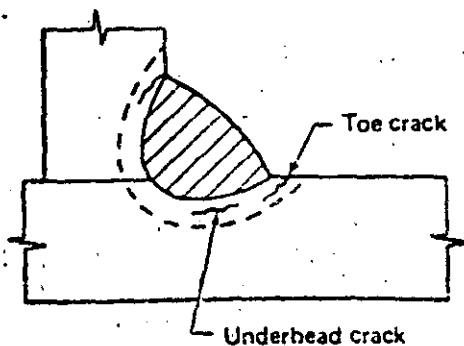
Underbead cracking and toe cracks caused by hydrogen pickup in heat-affected zone of plate.
